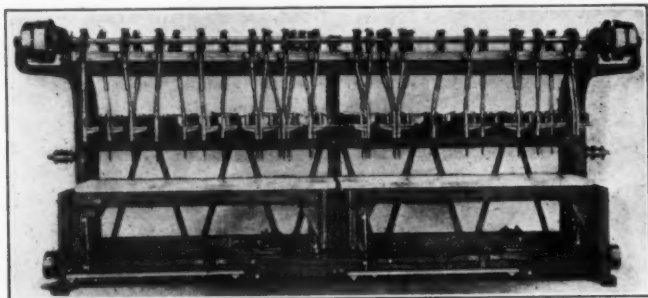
UNIVERSAL-JOINT GANG BORER—14-FT. MACHINE WITH DIVIDED TABLE
